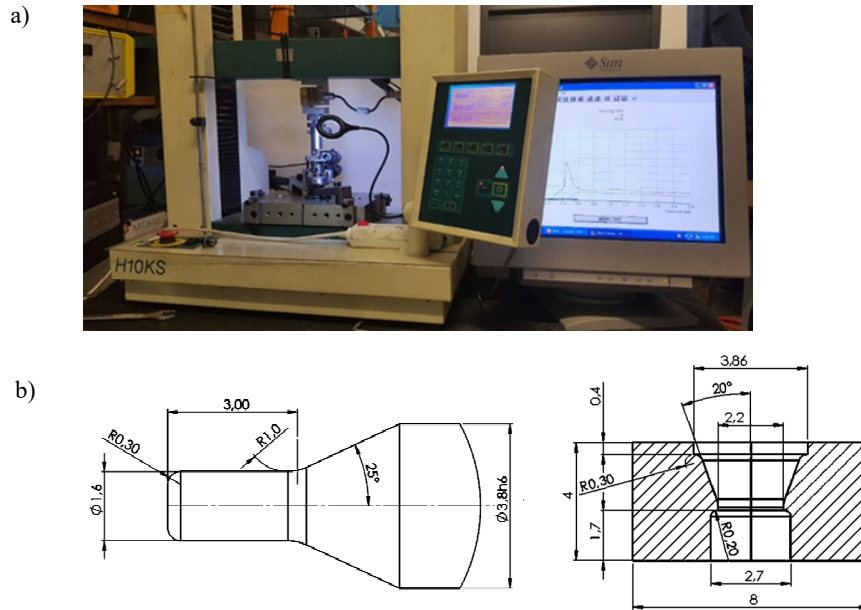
Setup for micro-drawing (a) and dimensions of the tools used (b)
